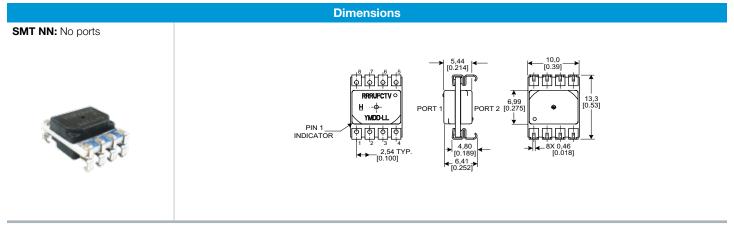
SMT Package Dimensional Drawings (For reference only: mm [in])
